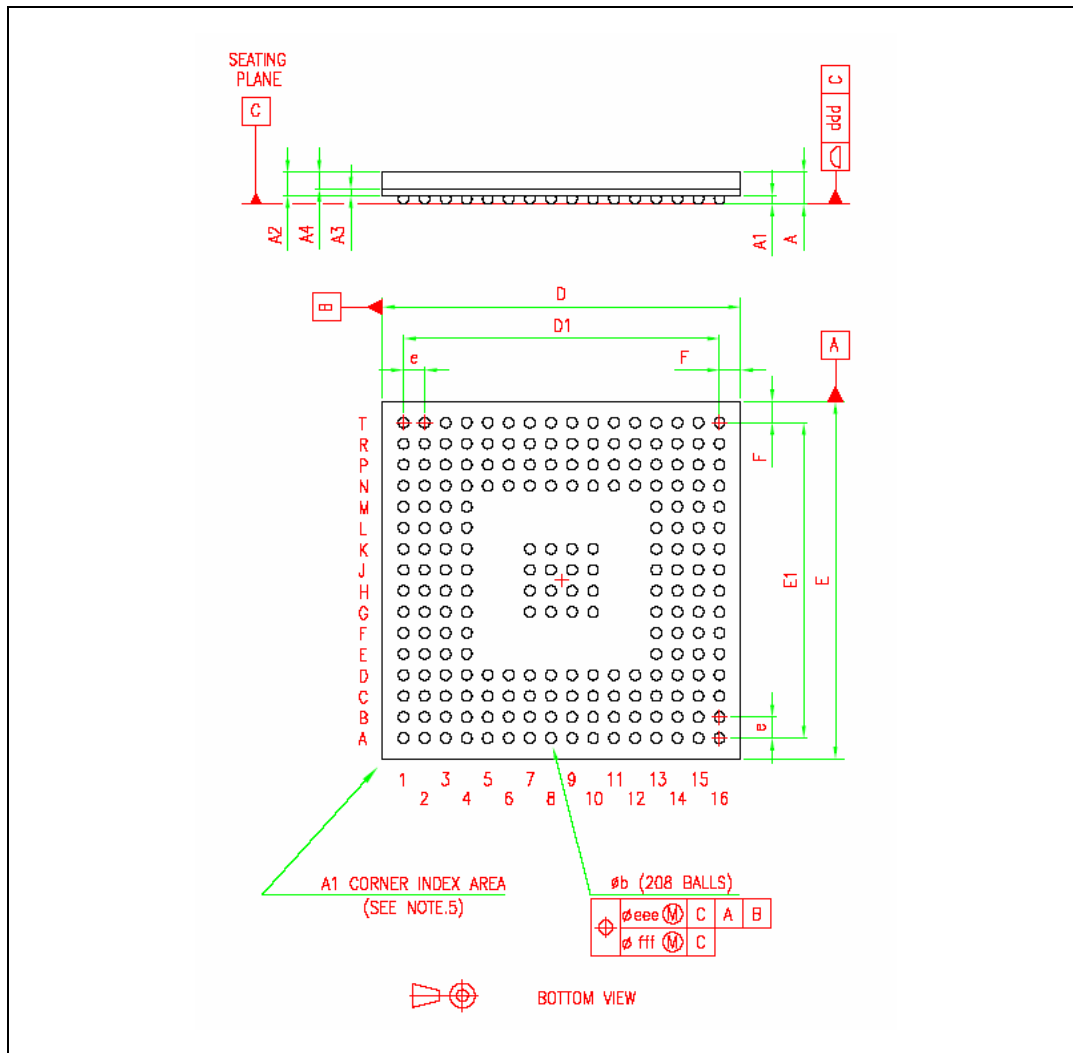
208 MAPBGA package mechanical drawing (Part 2 of 2)
